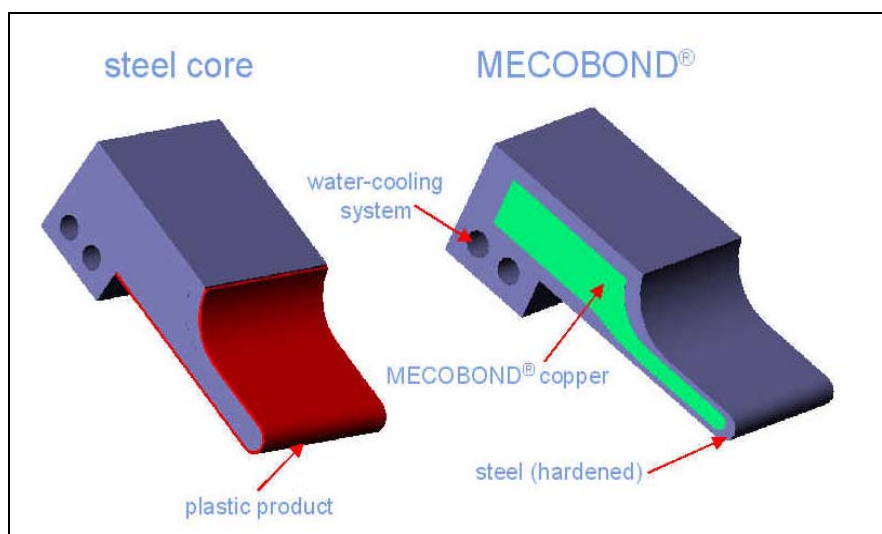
Mould inserts containing copper core by Mecobond [2]
